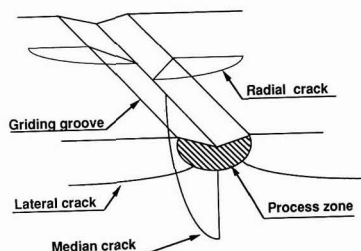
Schematic drawing of the scratch cracks caused by grinding.
